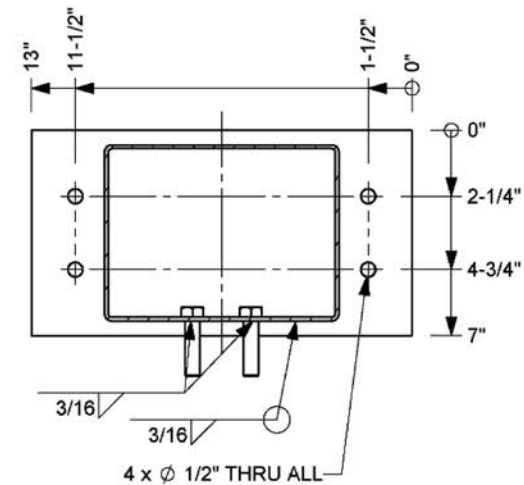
Tests 612941-02-3 and -4 terminal details.
